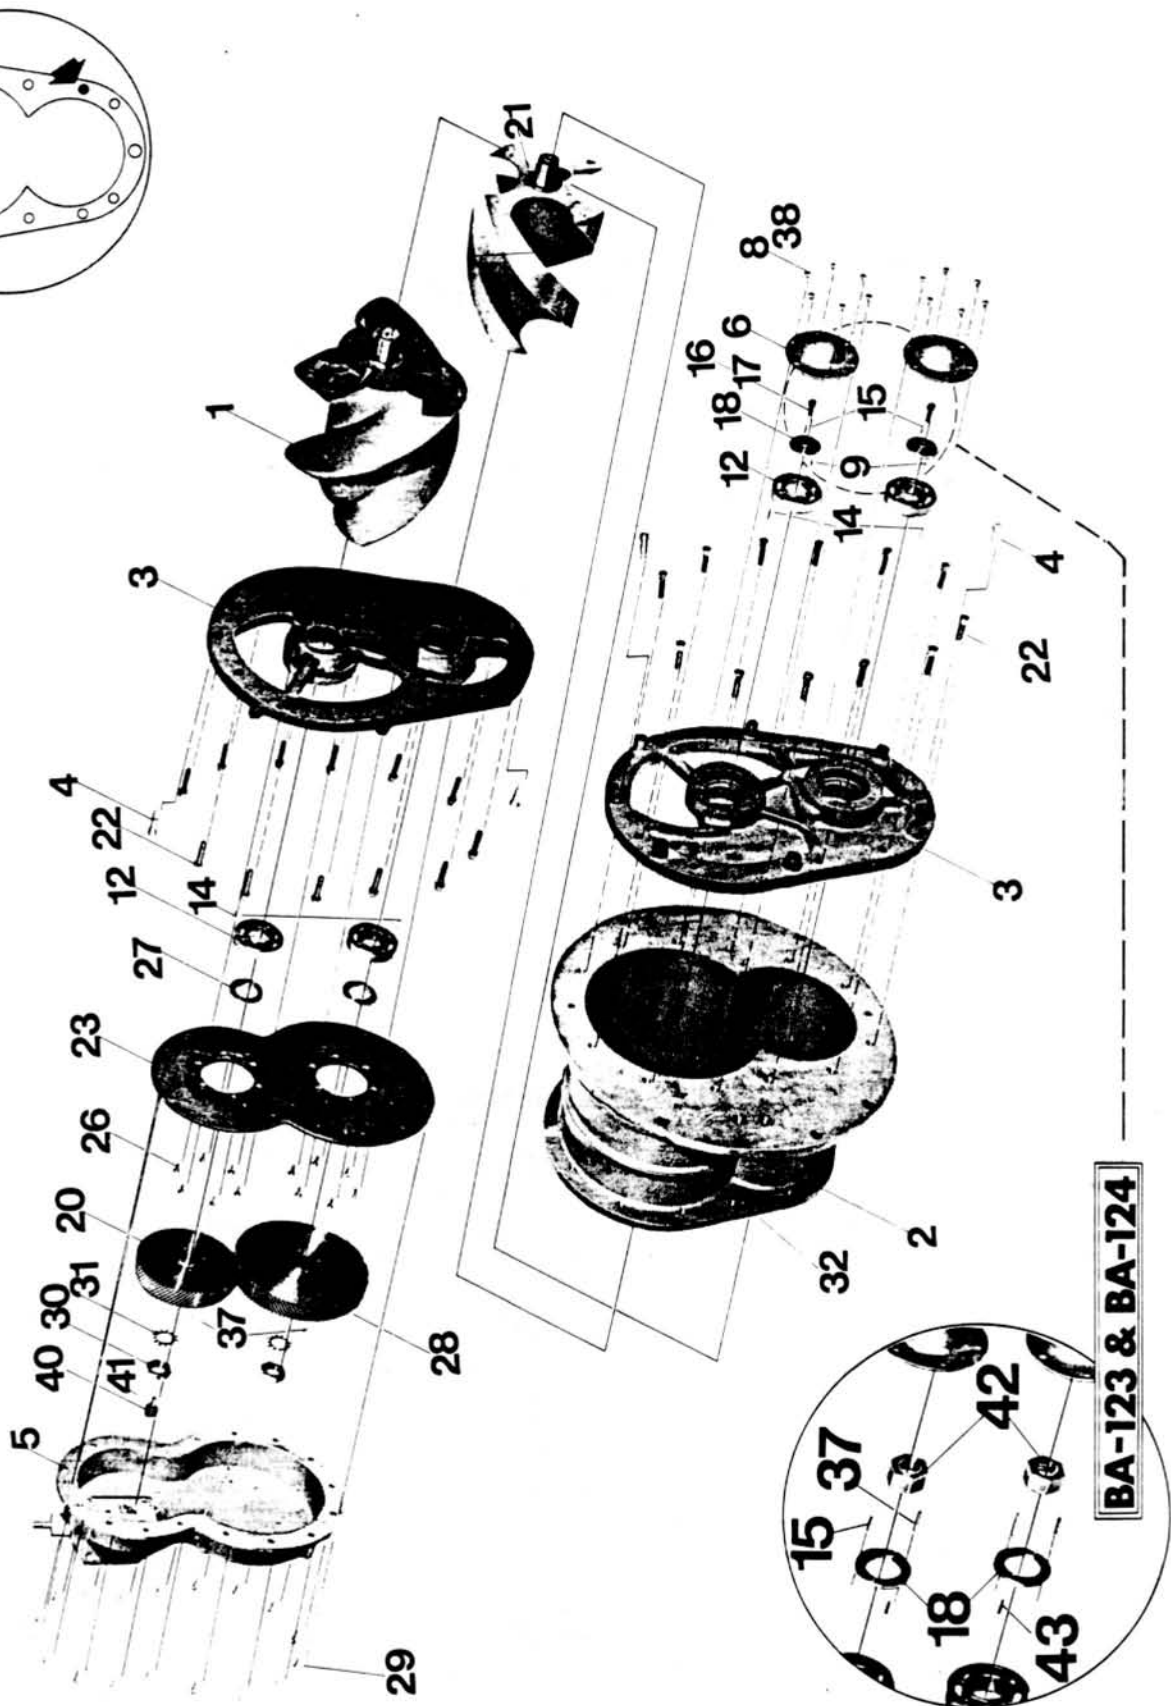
Complete Measuring Unit Assembly (103505-030 and 123505-030)
